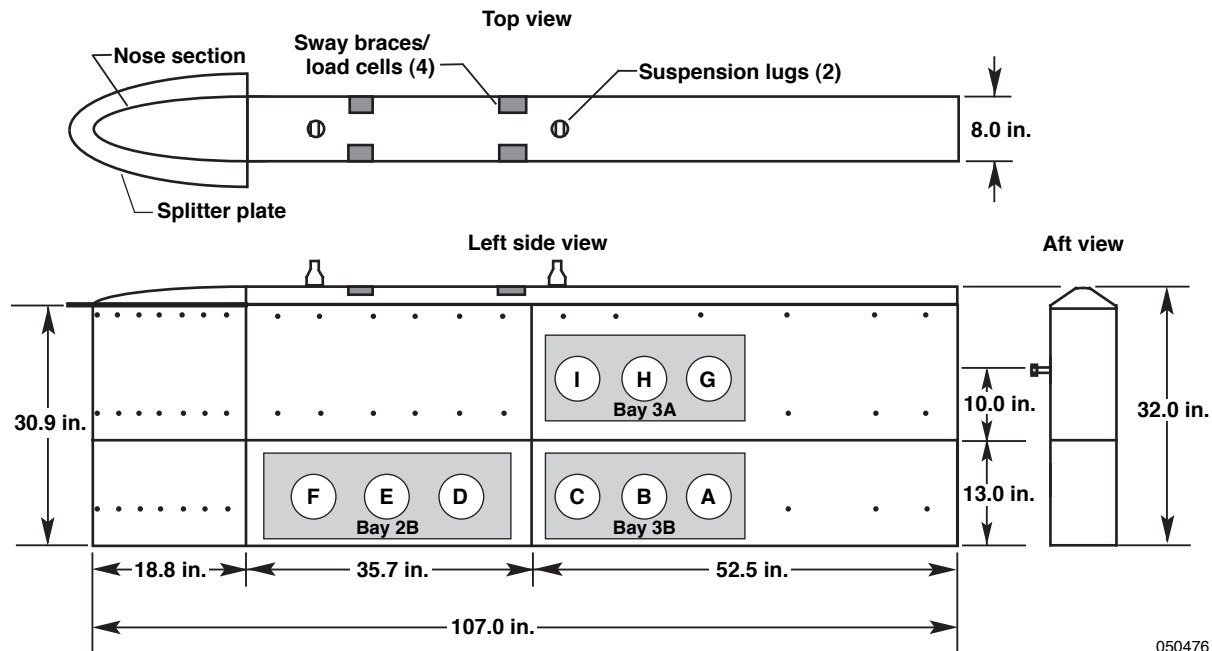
Details and dimensions of the Aerodynamic Flight Test Fixture.
